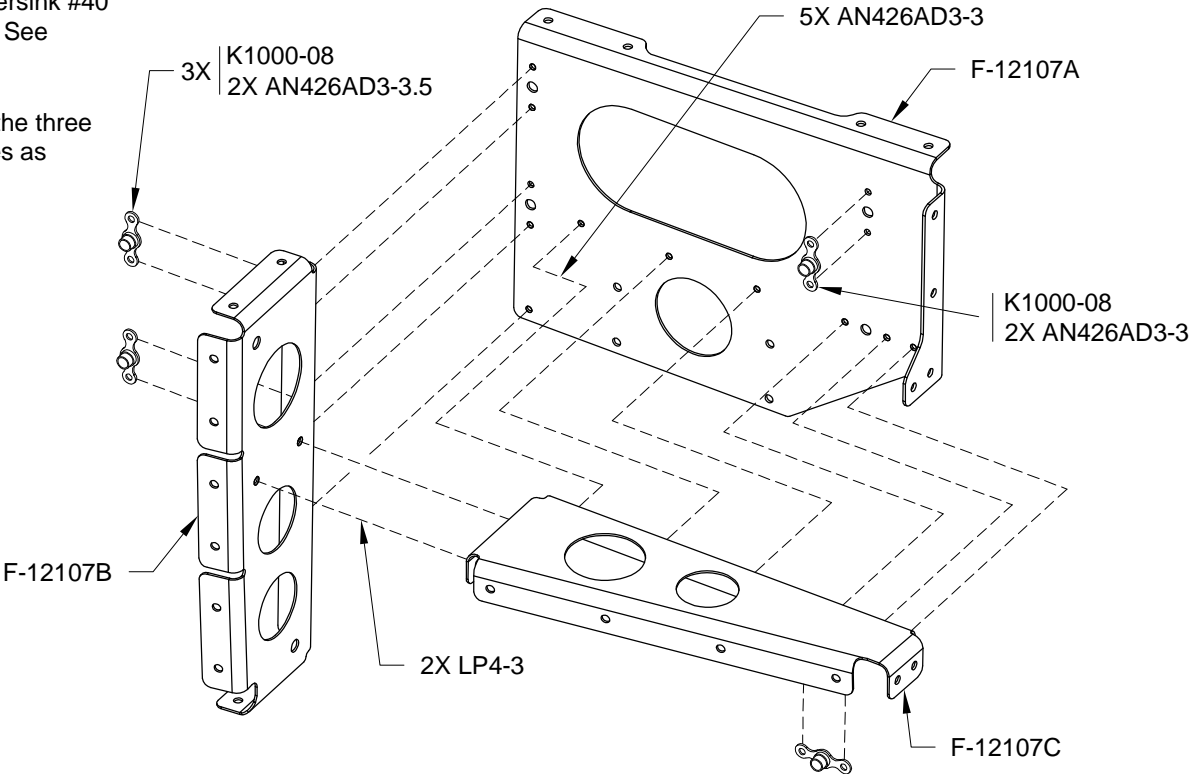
RIVETING ELT BRACKET ASSEMBLY
